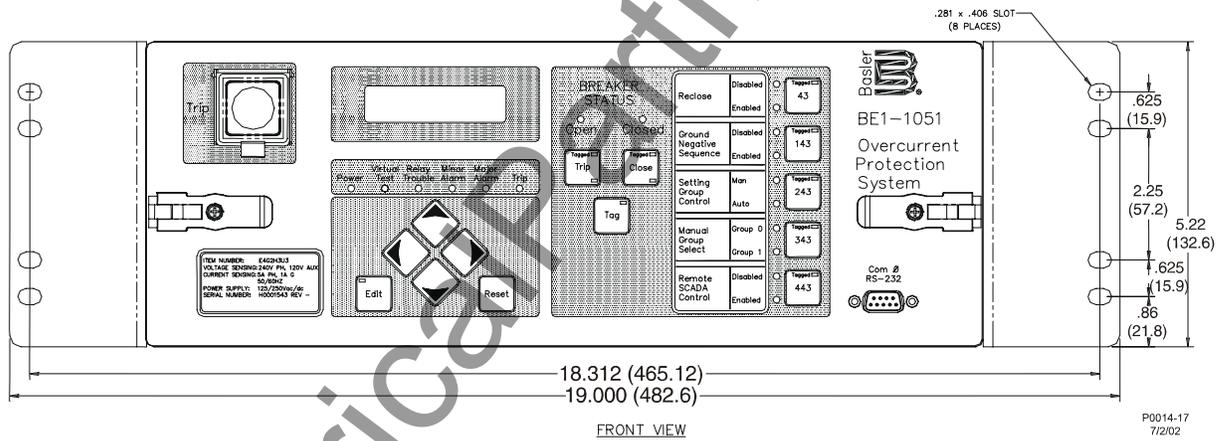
19-inch Rack Mount, Front View, Overall Dimensions
